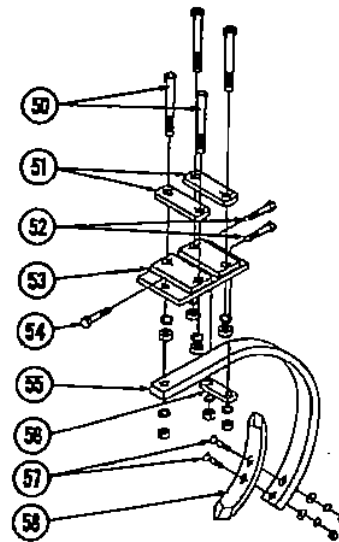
BALK BREAKER ATTACHMENT — MACH. NO. 299053
